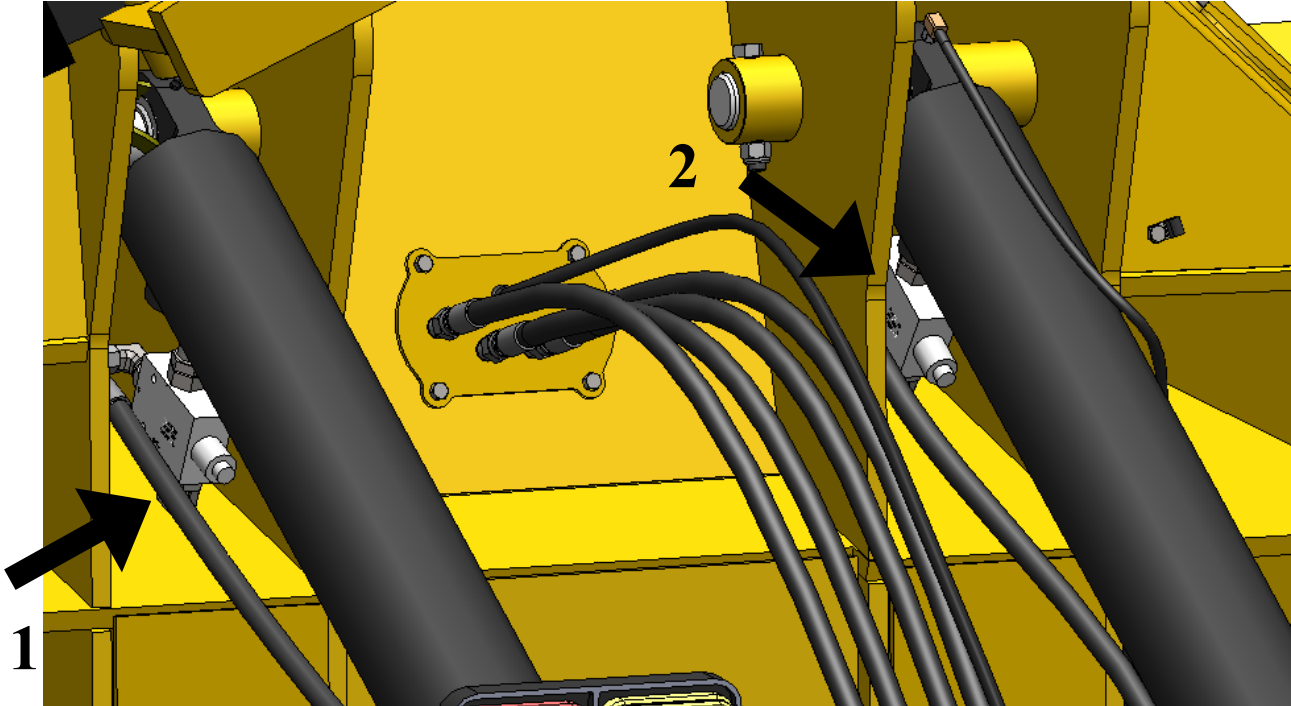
Lift Cylinder Check Valve Safety Locks
